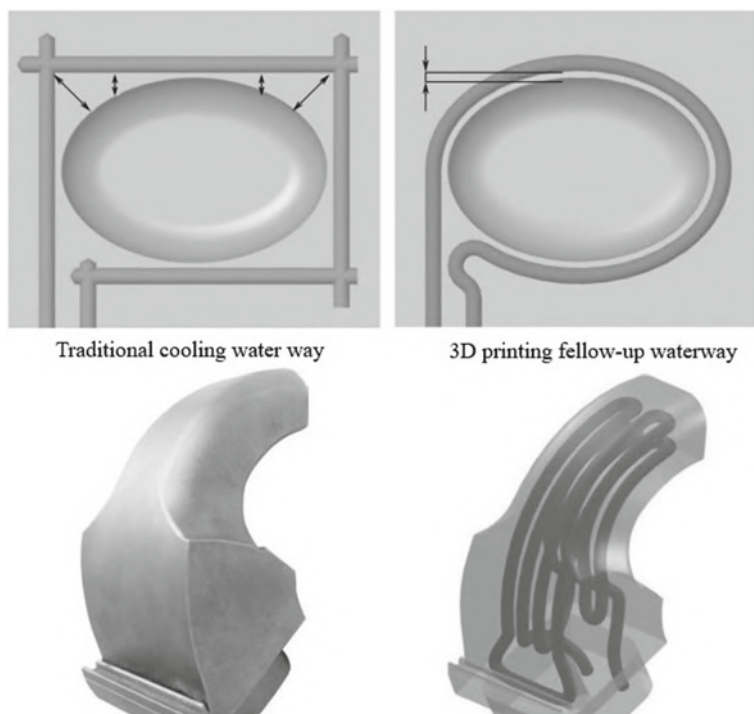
3D printing metal follow-up and special-shaped waterway molds
